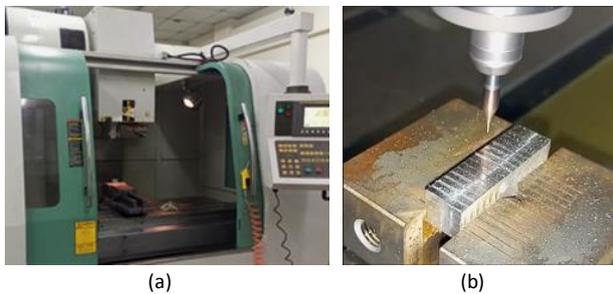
Experimental setup: (a) vertical milling center; (b) Machining process
